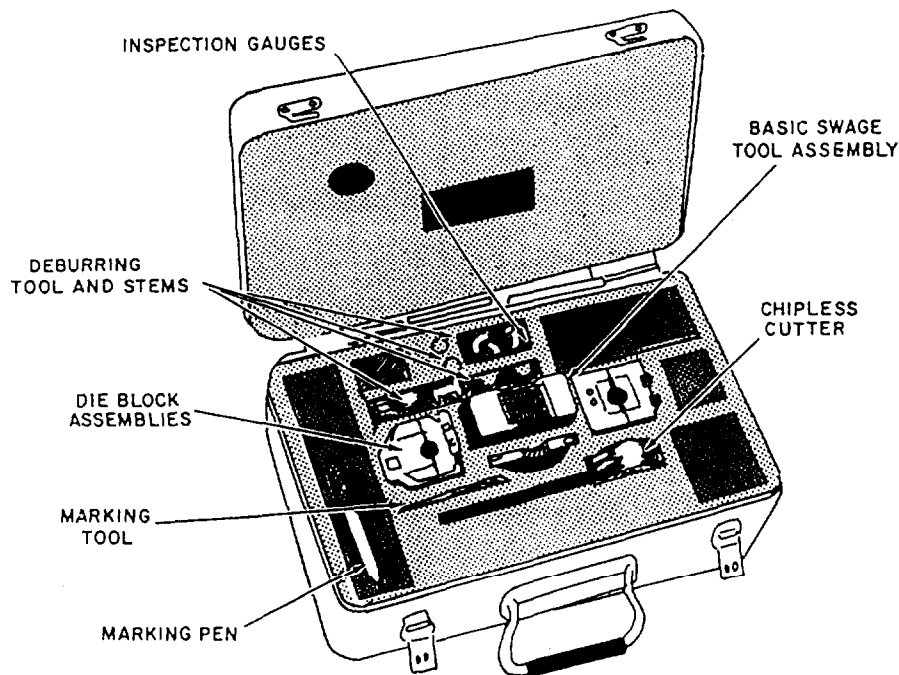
Permaswage Tool Kit D10031-812S.
